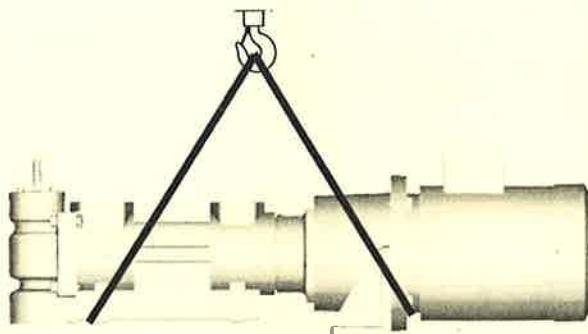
Fastening the lifting gear to the pump unit (horizontal)
